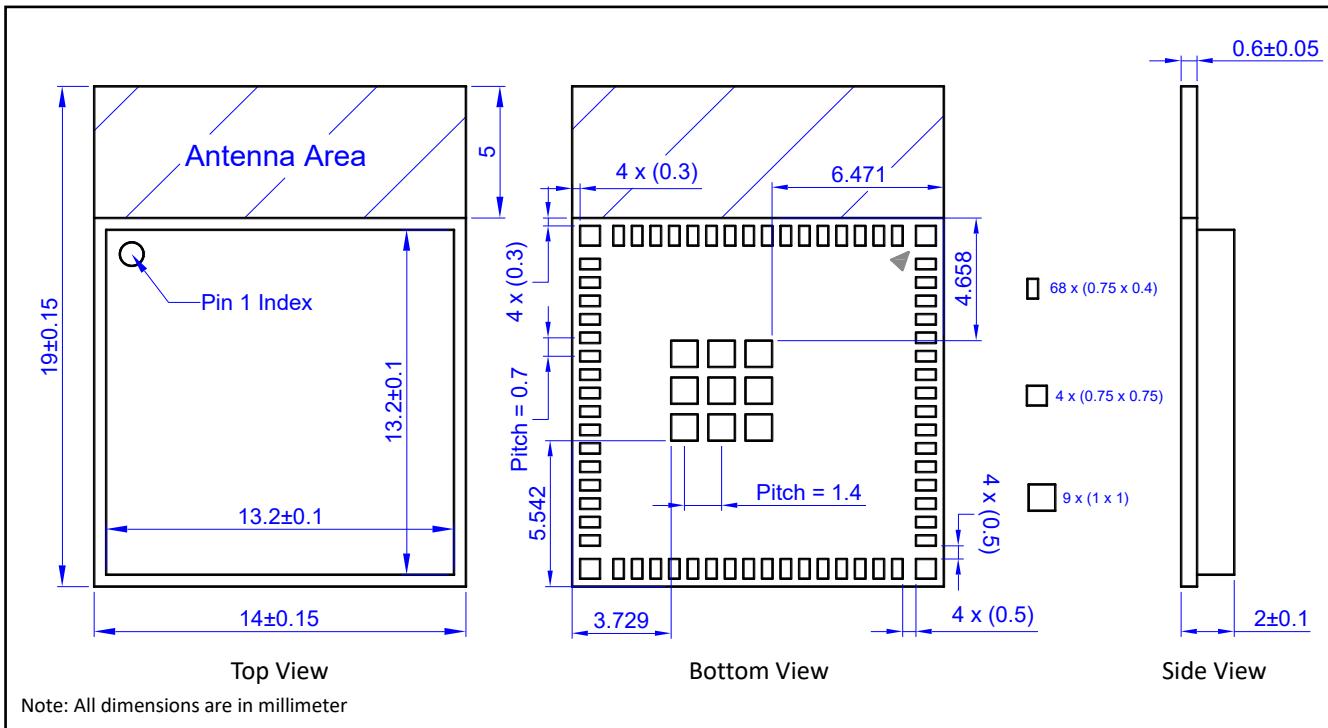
Mechanical Drawing of BDE-BW3551A and BDE-BW3551U
